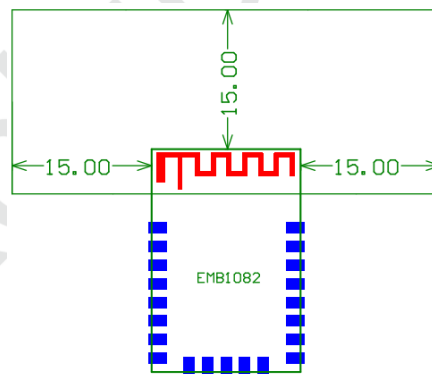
Minimum Clearance Zone of PCB Antenna (Unit: mm)
